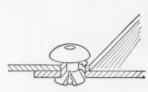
Expanded prongs force sheets or parts together, hold them tightly in compression. No metal is removed, no grinding or finishing is required.
